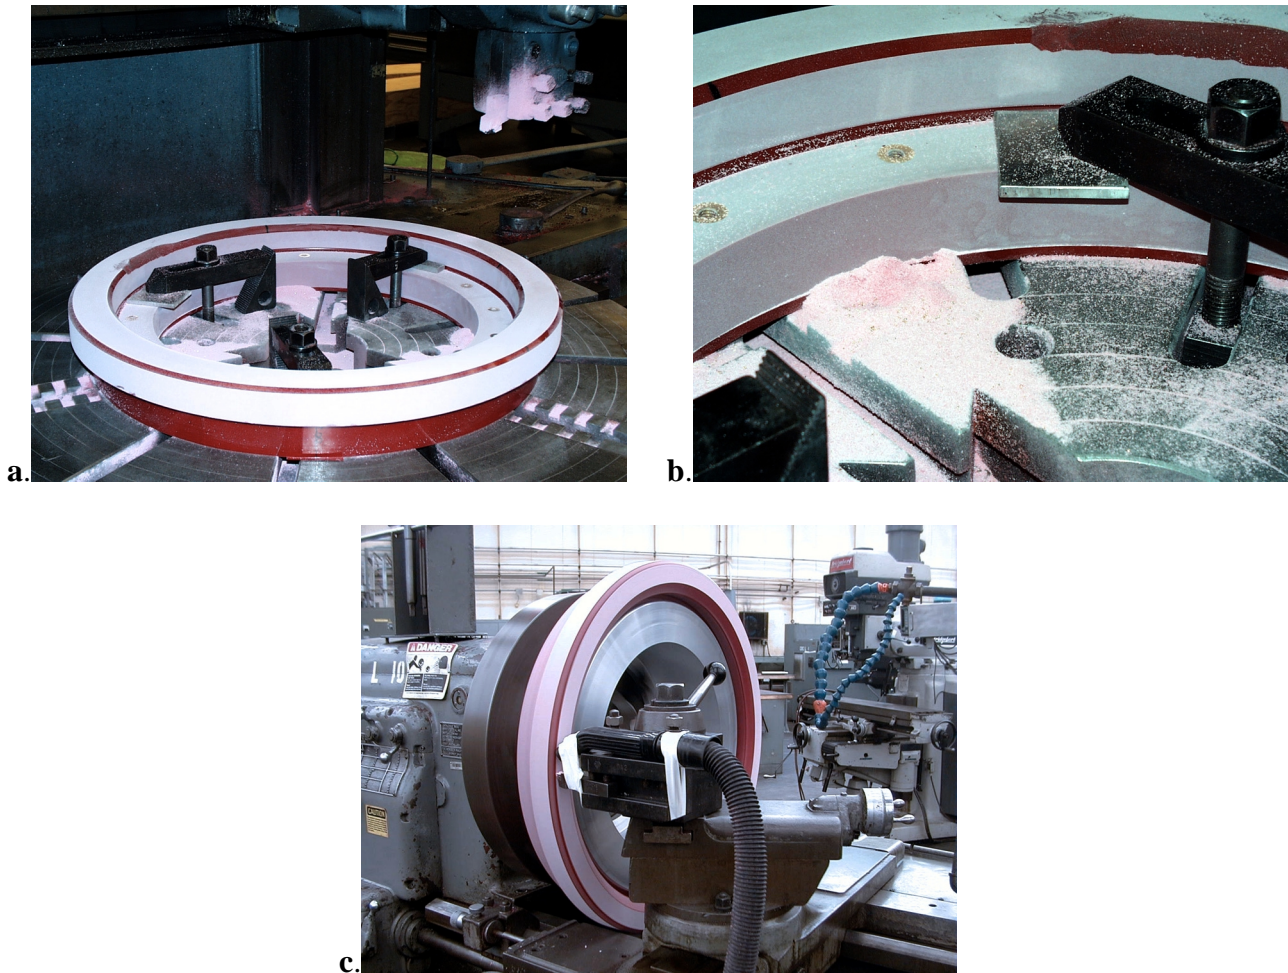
(a) Picture of the casting in a vertical lathe after an operation. (b) A close-up view. (c) Machining on a horizontal lathe. Note the vacuum nozzle attached to the cutter.
